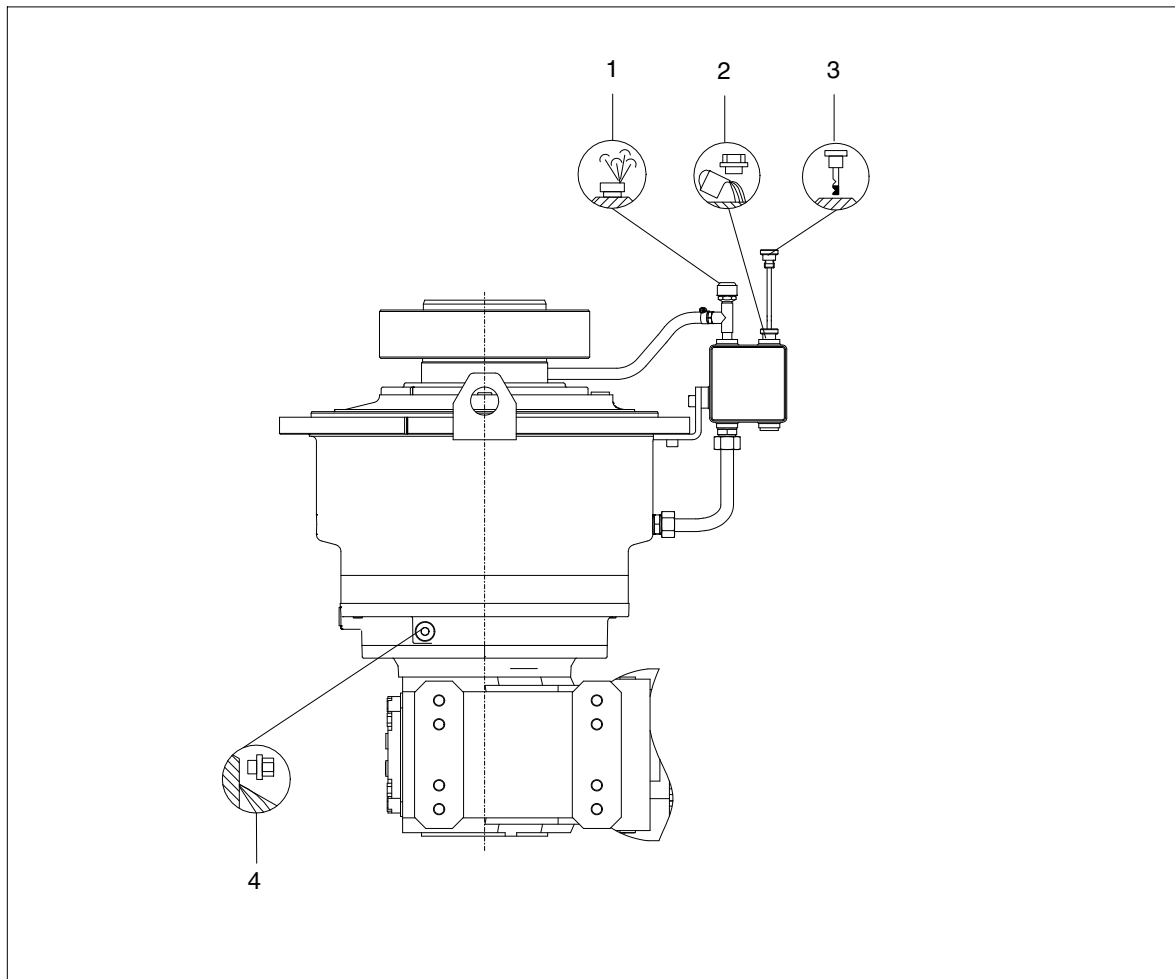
Gear-unit features on gear units of type O5R ("LSS" bottom) <sup>1)</sup>
